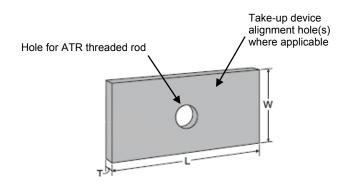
BPRTUD BEARING PLATE (BP bearing plates are similar but do not have take-up device alignment holes)
